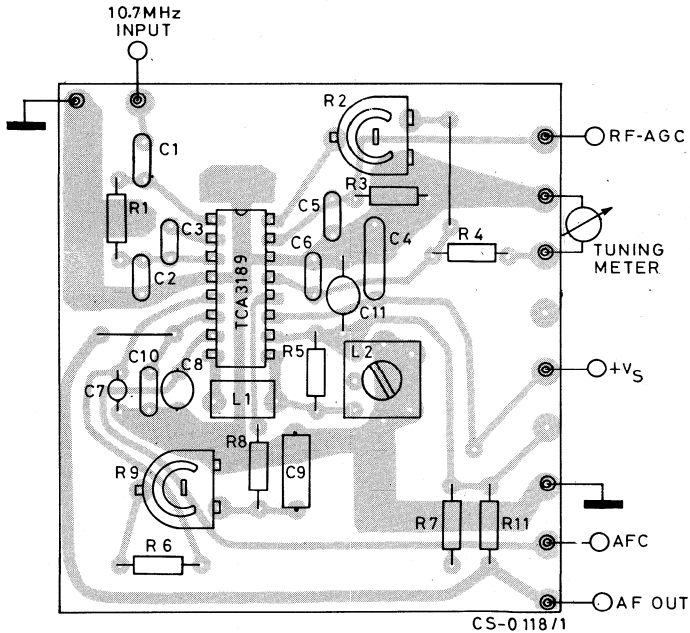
P.C. board and component layout of the single tuned circuit (1:1 scale)
